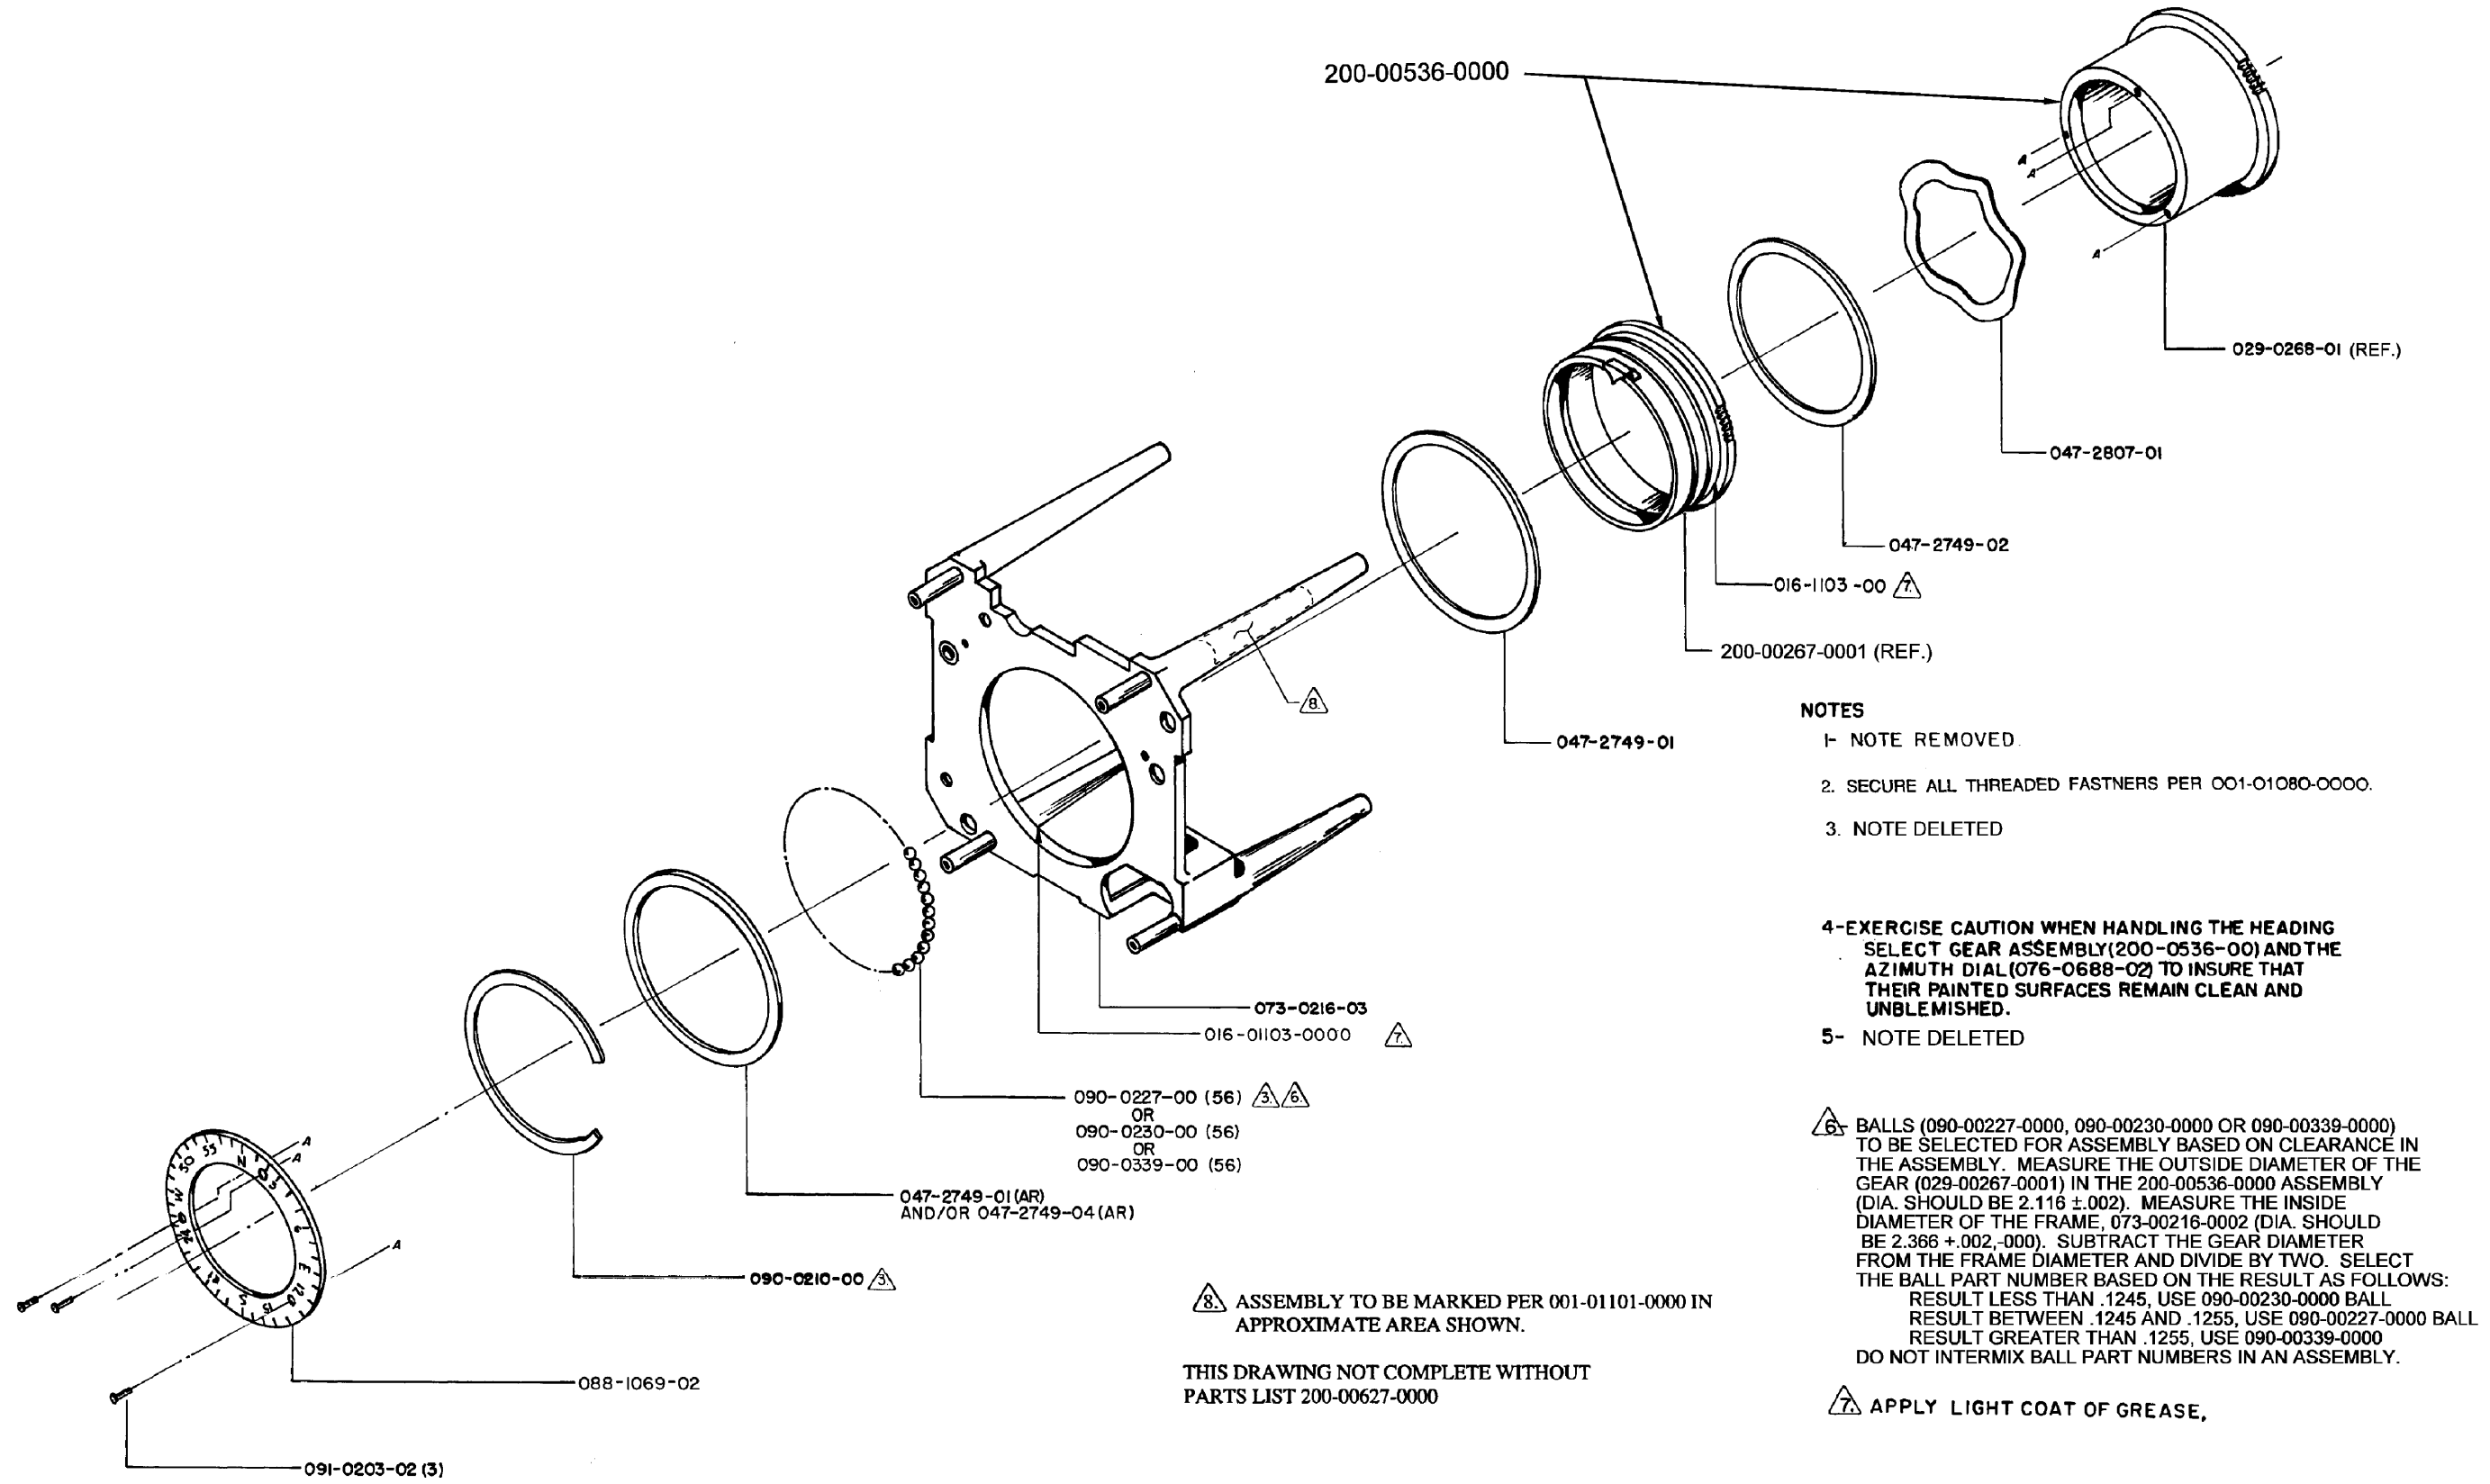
A KI 525 FRONT DISPLAY ASSEMBLY
